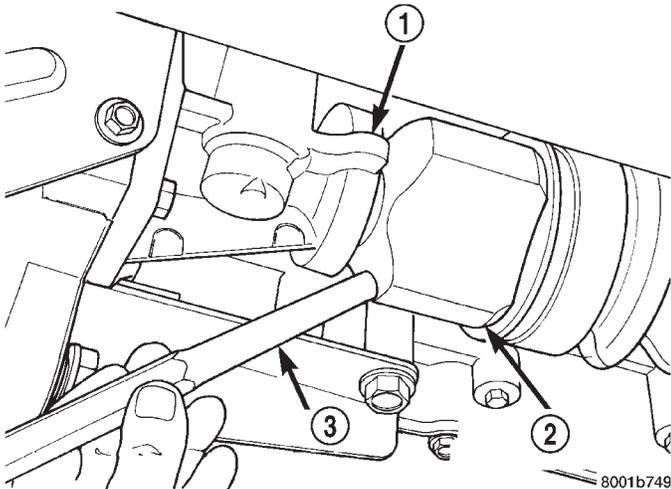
Disengaging Right Inner Tripod Joint from Transaxle
